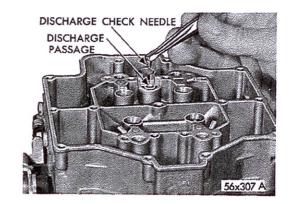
Installing Accelerator Pump Discharge Check Needle
